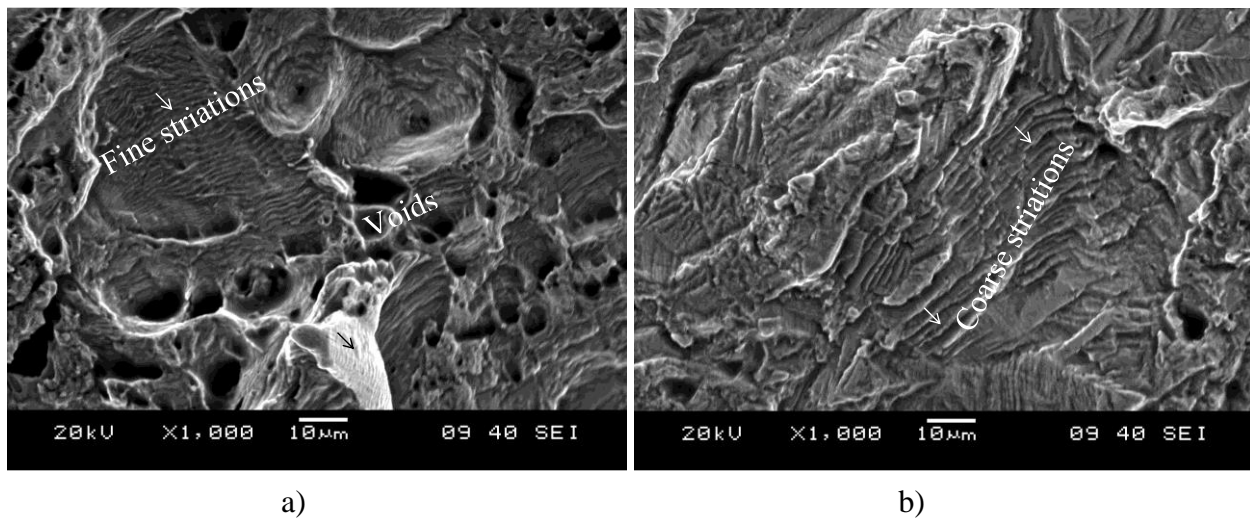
Fatigue fracture of INCONEL601 fine and coarse striations bands. a) as received, and b) annealed alloy
